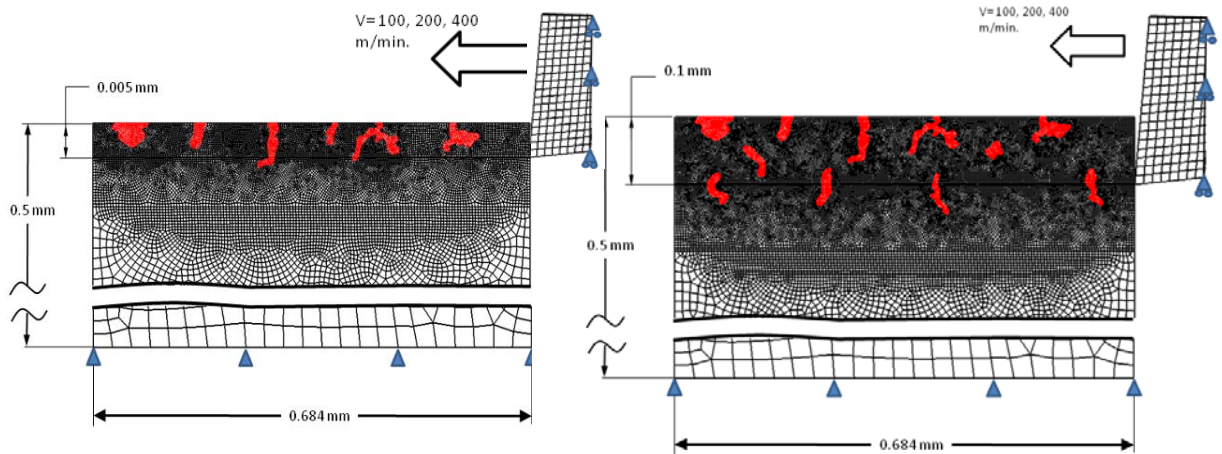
Finite element model of CGI in machining (0.05, 0.1 mm/rev.)
